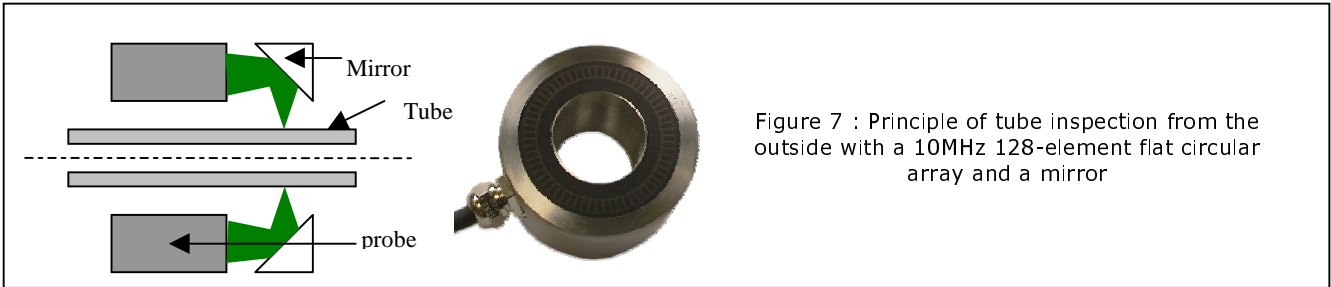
Principle of tube inspection from the outside with a 10MHz 128-element flat circular array and a mirror
